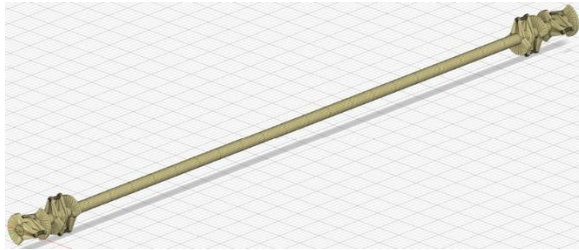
8-cylindered crankshaft with the adjusted crank throw
